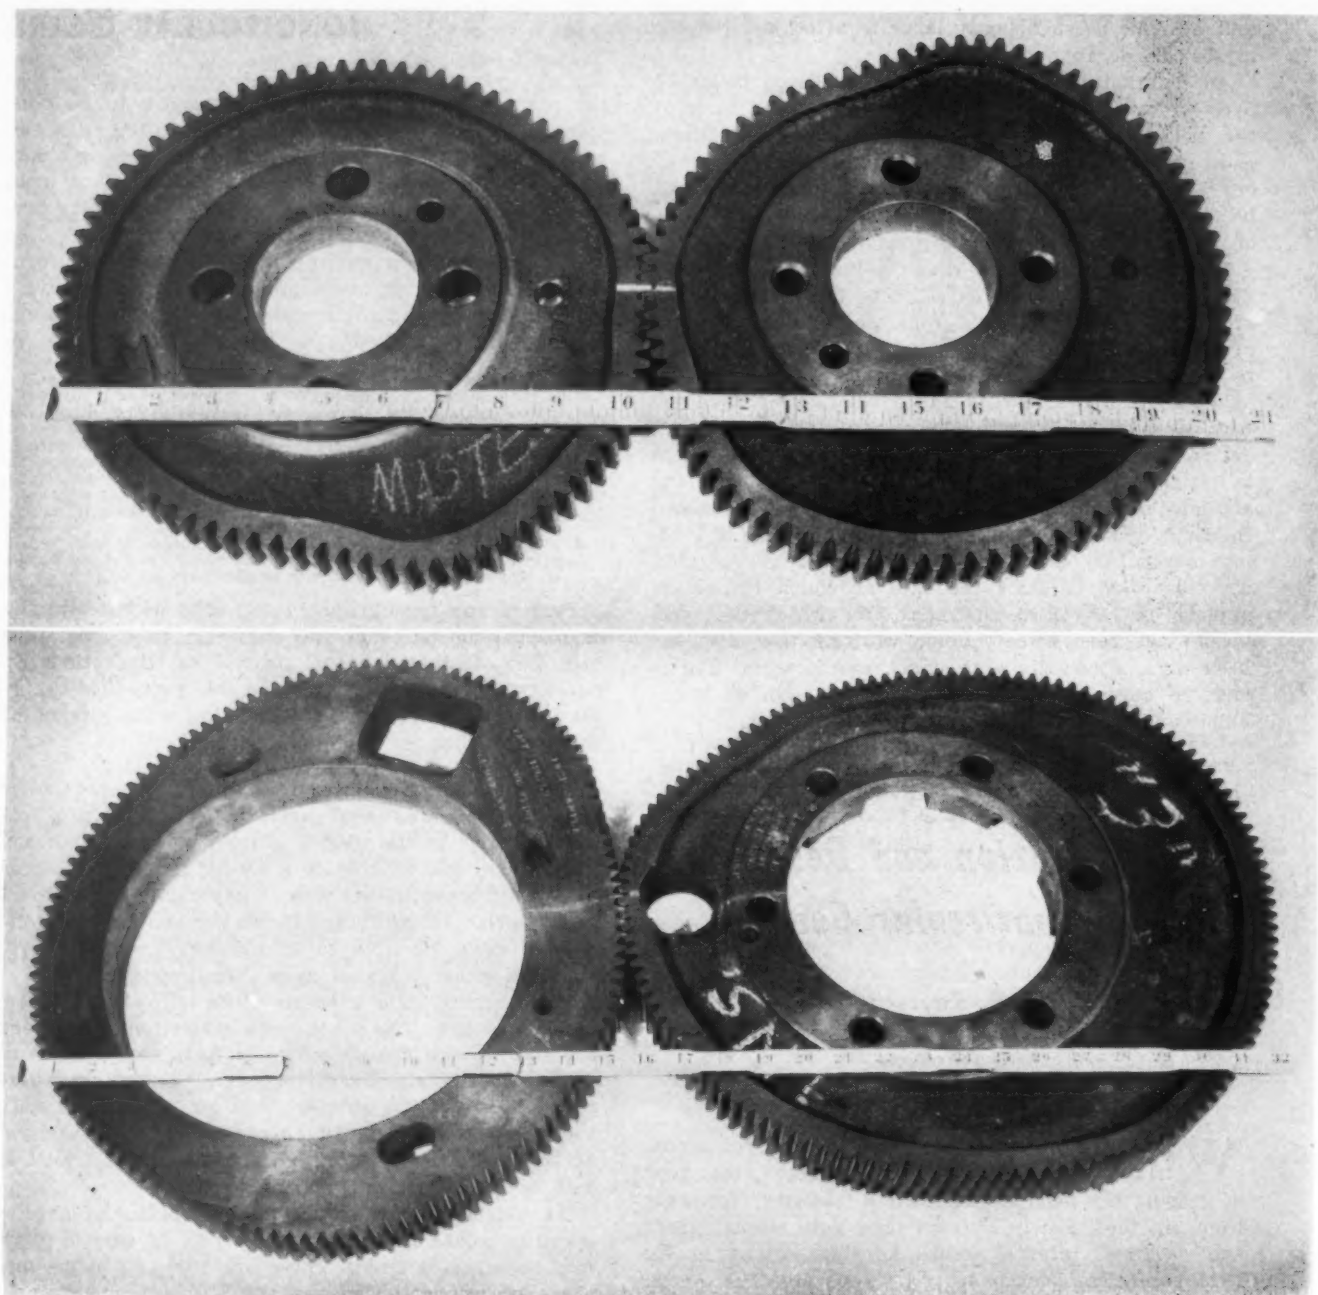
Master gears used in the manufacture of similar noncircular gears
